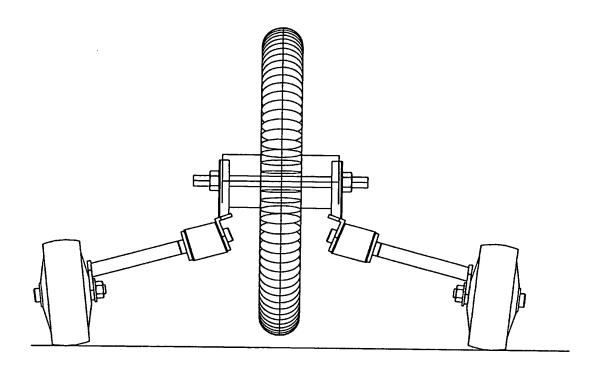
Training wheels in un-loaded state but positioned for pre-loading by the weight of the rider – rear view
